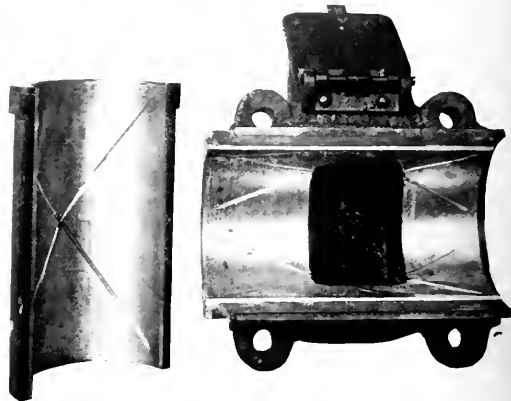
AXLE BEARINGS, BABBIT-LINED.
